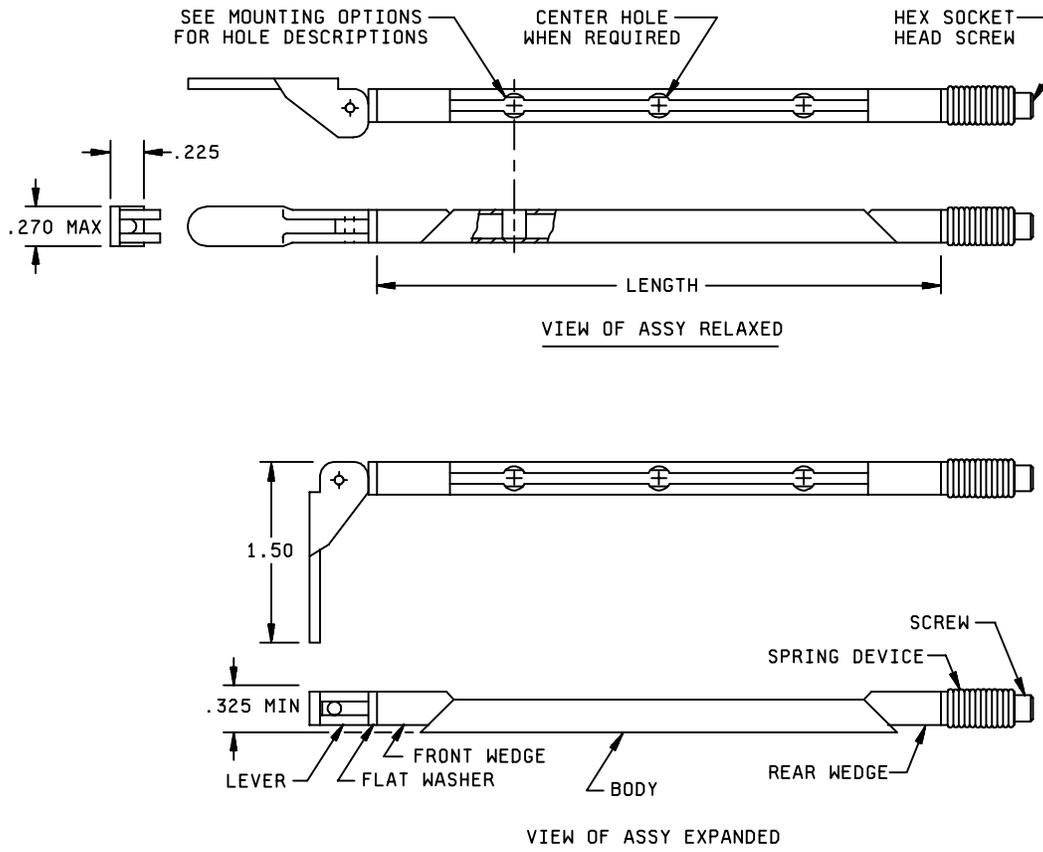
Relaxed and expanded dimensions. (Right hand configuration shown)
